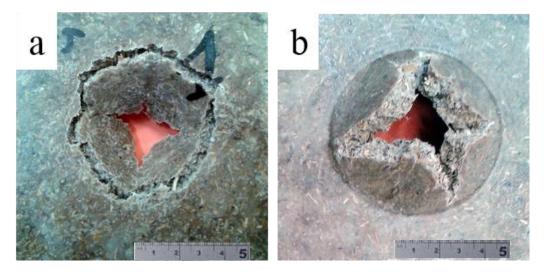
Damage pattern of Palm/PCL specimens impacted at 50 Joules (a) front face damage and (b) rear face damage.
